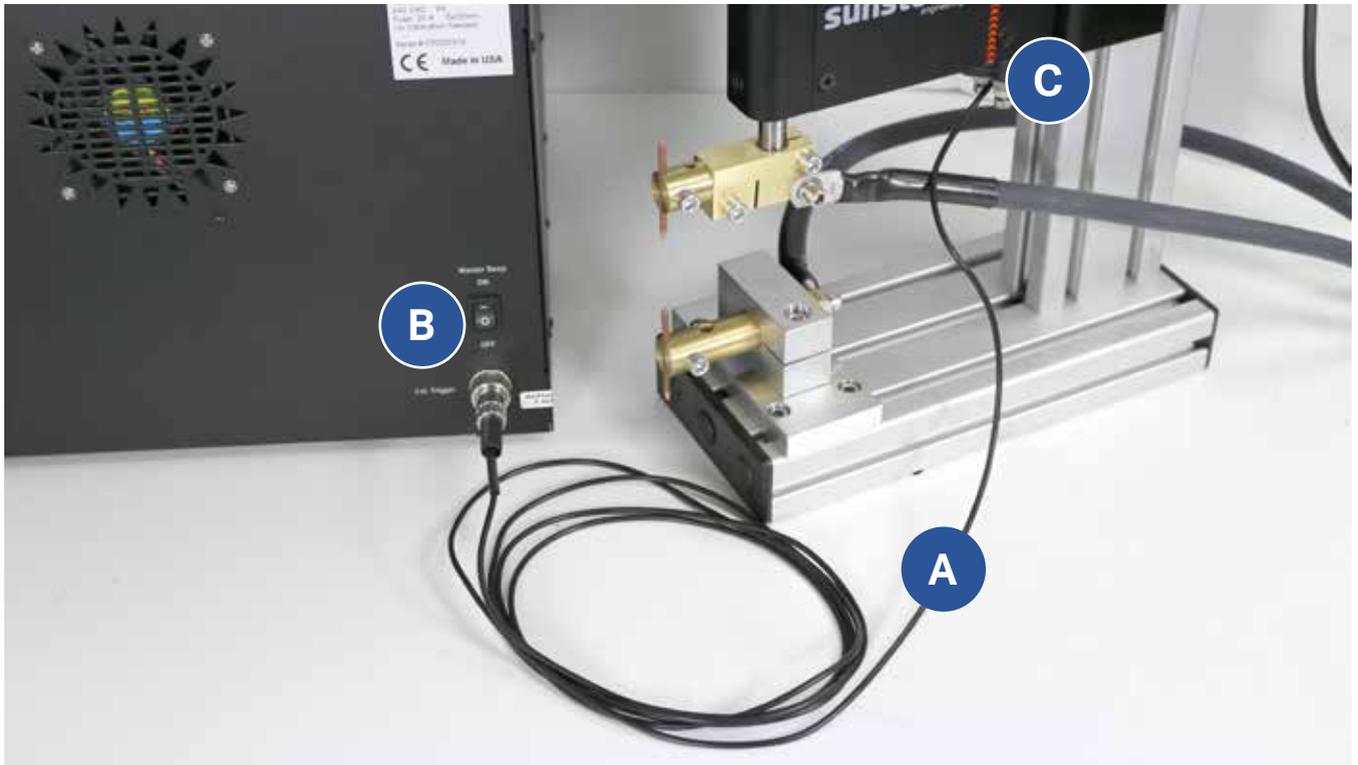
For automatic triggering, connect the Weld Head Actuating Cable (A) to the Trigger Port (B) on the back of the welder. Refer to your Sunstone welder users guide for the proper port to use on the back of the welder.
